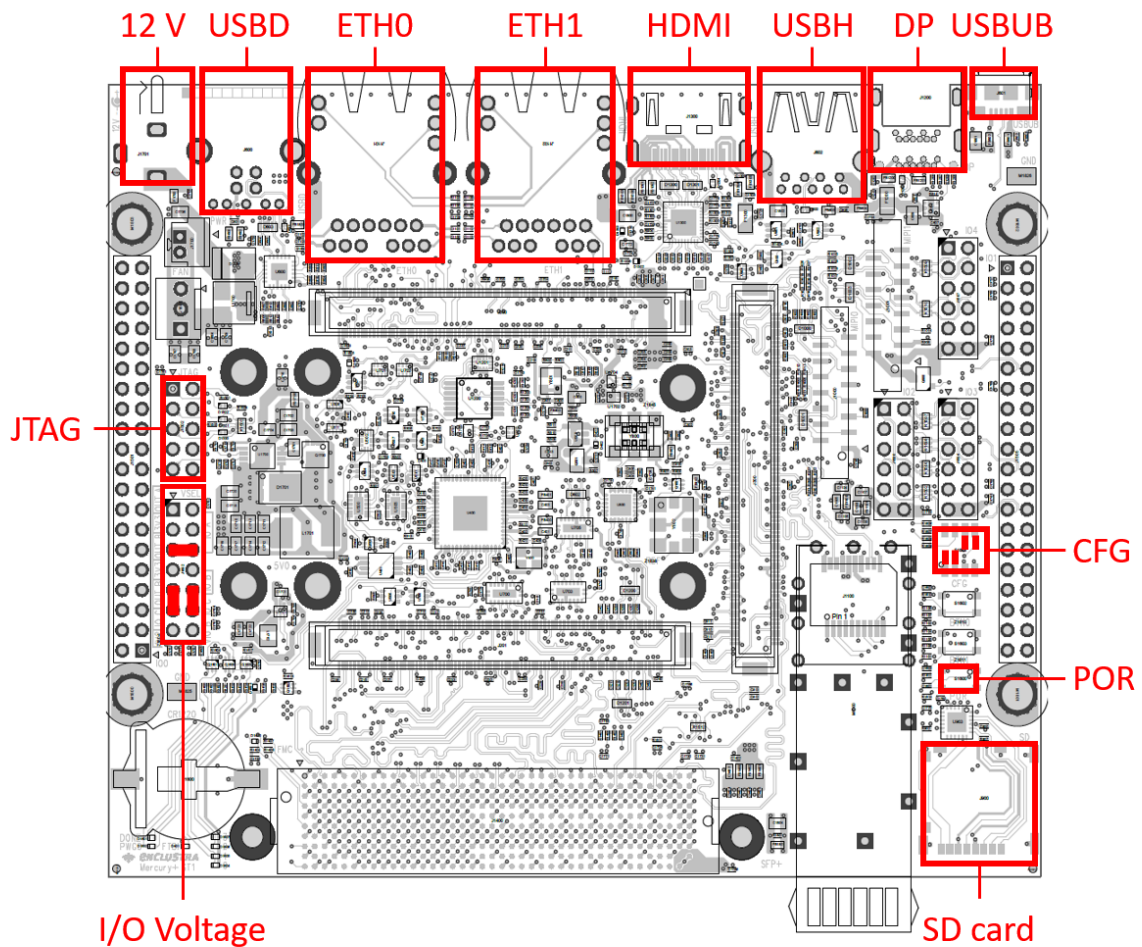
Mercury+ ST1 Base Board Assembly Drawing (Top View)
